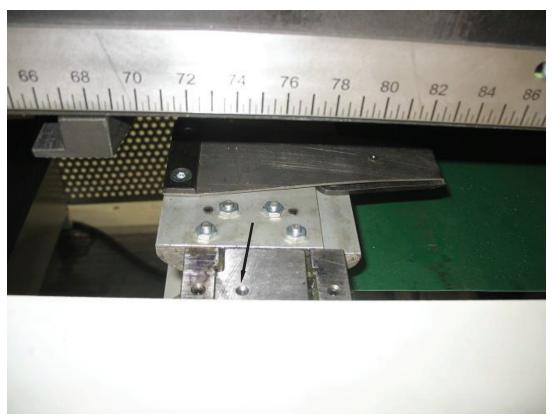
Gripper bar joint (8 pcs, symmetrical), oil filling type: B
